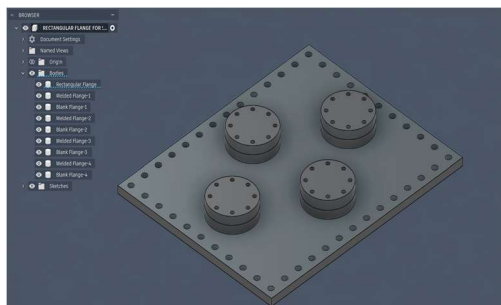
16 mm Rectangular Vacuum Vessel Flange with CF-63 Flanges
